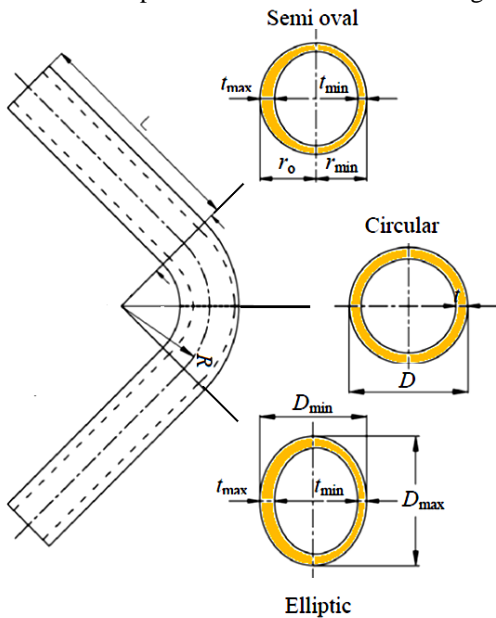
Tube Bend with Attached Straight Tube Showing Ovality
